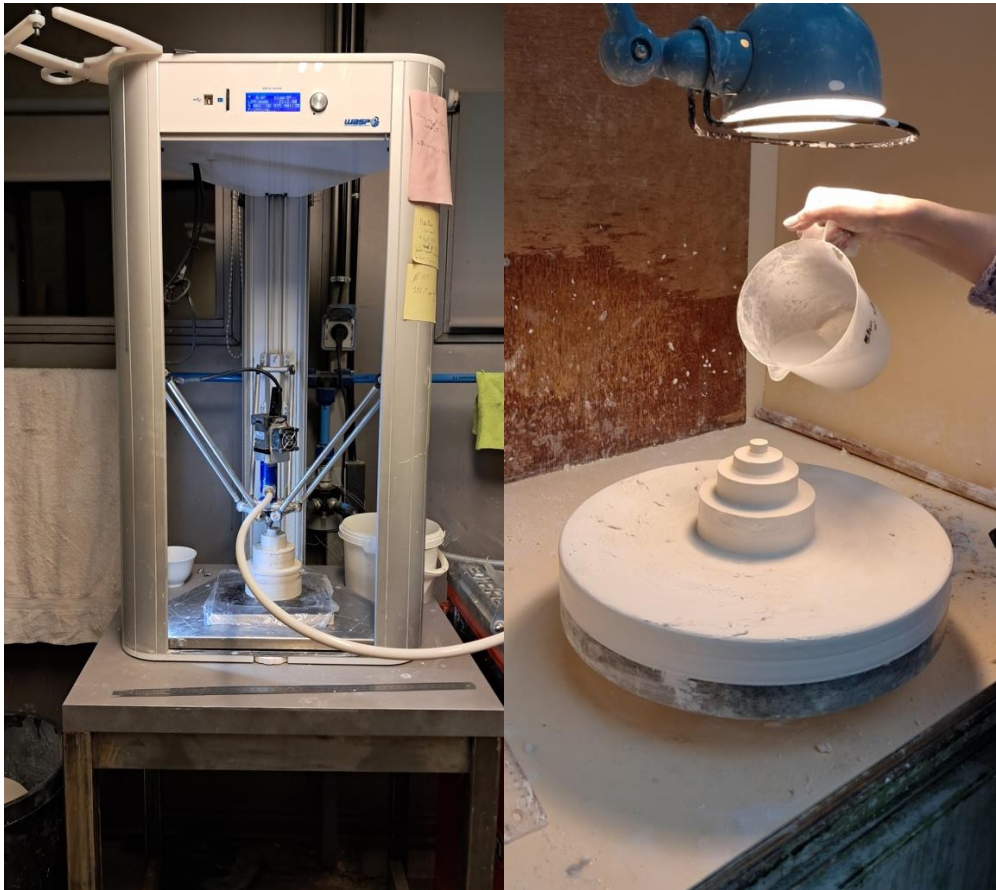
Ceramic 3D printing process / Turning techniques on Plaster Wheel
